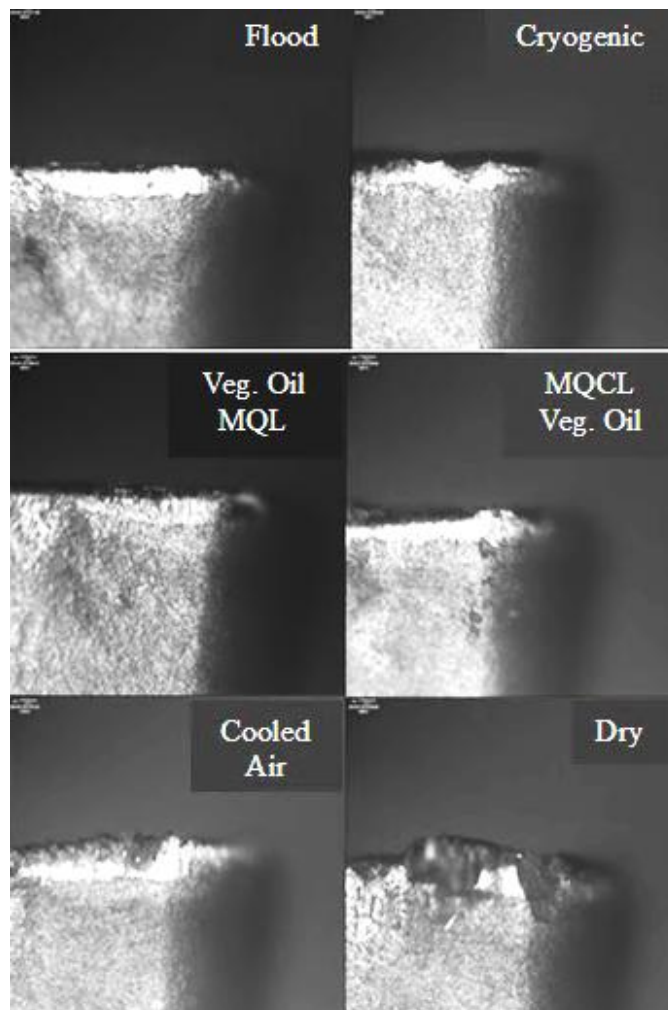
Flank tool wear at feed=0.1 mm/rev and speed = 90 m/min using optical microscope
